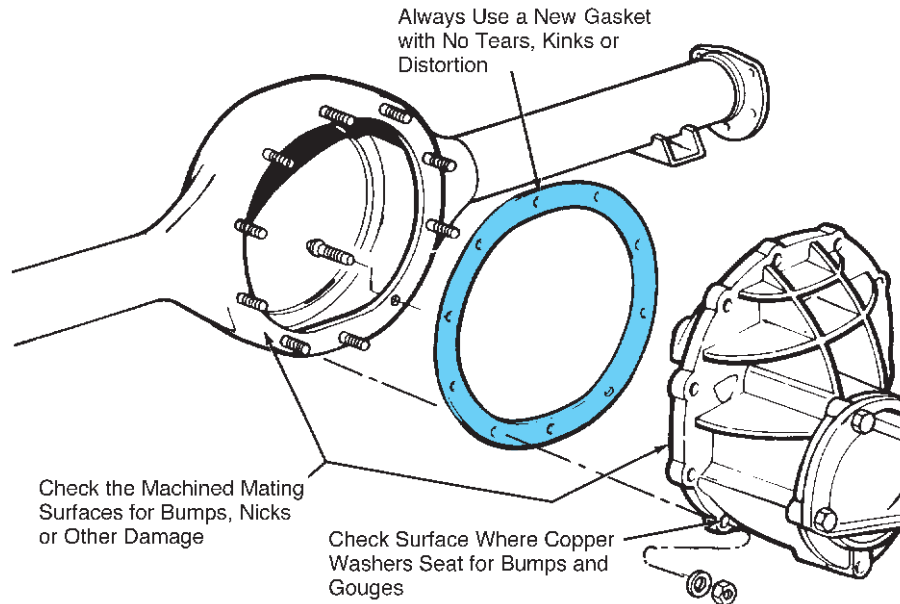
A new gasket should be used when replacing a carrier. (Courtesy of Ford Motor Company)
